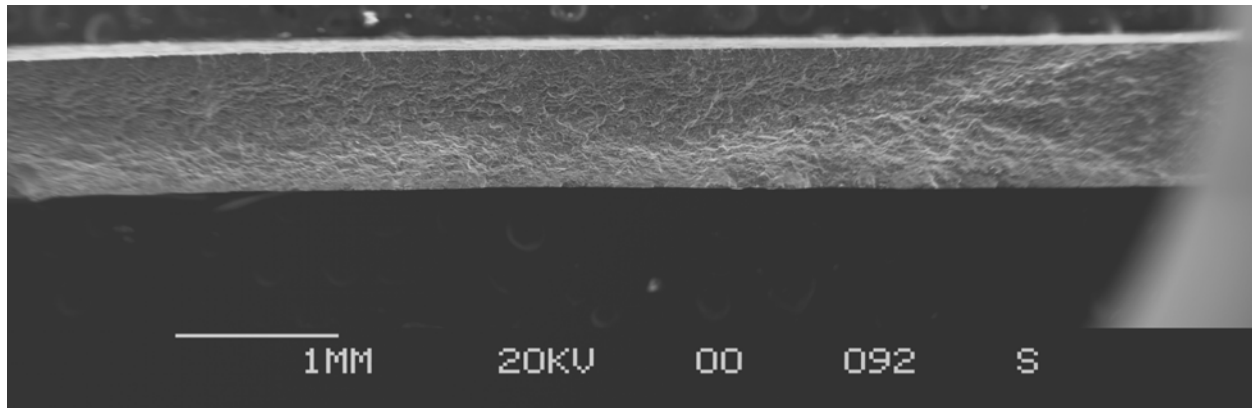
Fatigue Crack on Fracture Surface of Specimen 5832.
